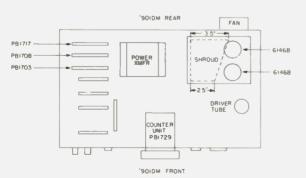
Placement of 6146B cooling shroud and printed boards, as described in the text.
